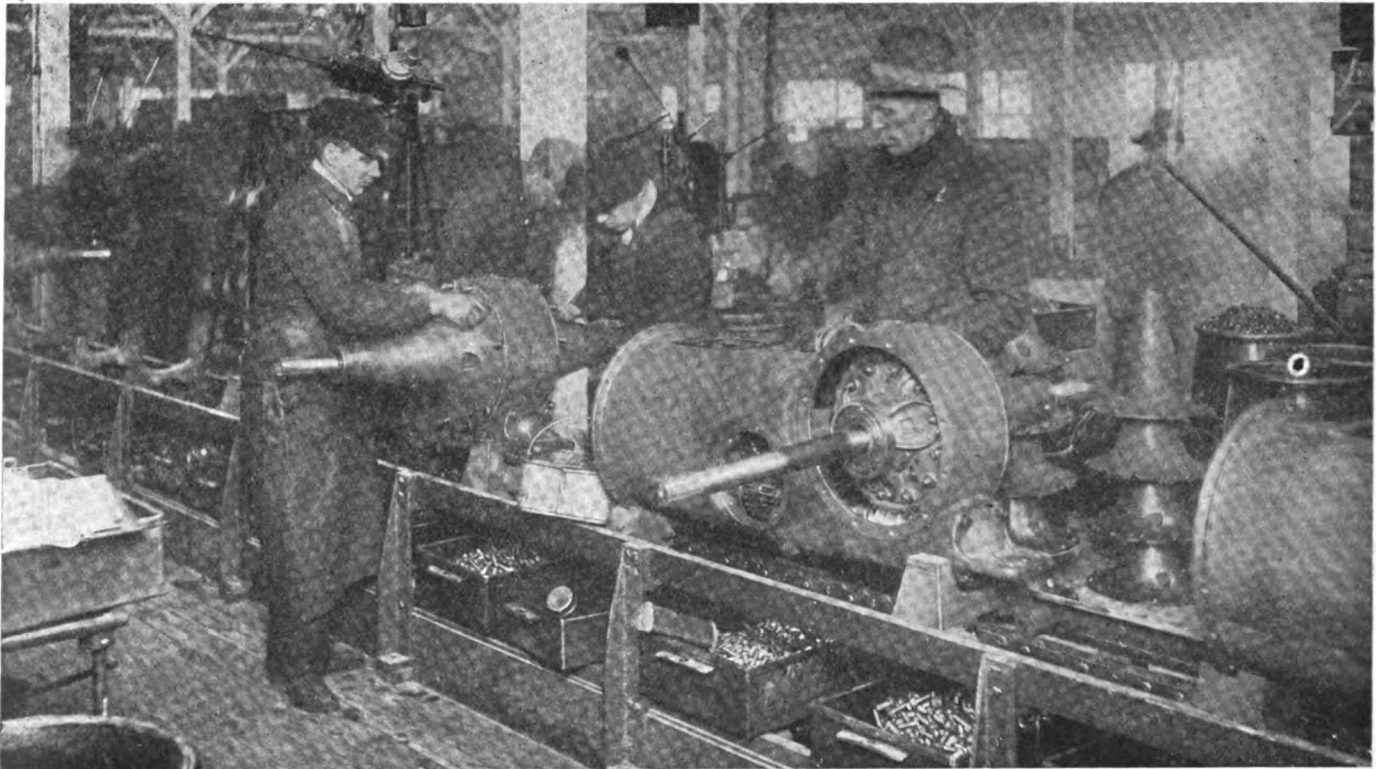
Section of the transmission housing assembly track, showing how the men work on both sides and how the nuts and bolts are carried in pans beneath the track. The bearings and bearing cases are held in containers close to the track. Men are working on both sides of this track, performing symmetrical operations
